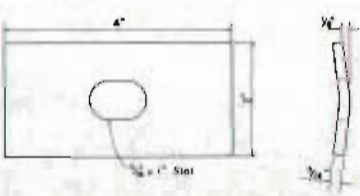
PLATE WASHER FOR METAL BEAM AT STIFFENERS (Galvanize After Fabrication)
